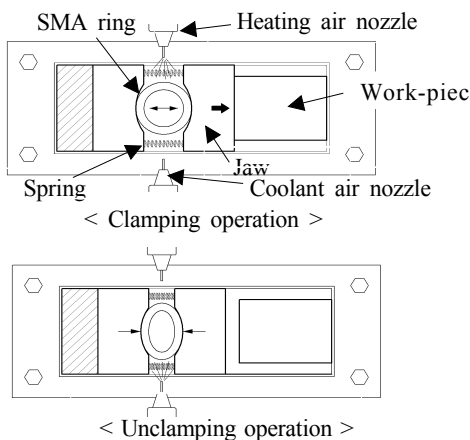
Basic configuration of SMA-based workpiece-chucking device
